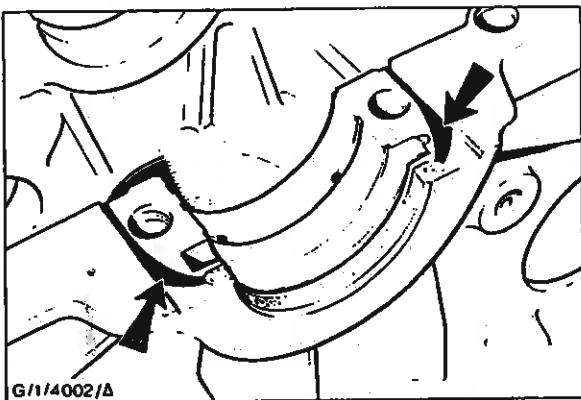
Crankshaft Rear Main Bearing Housing (Apply Sealer in areas shown)
